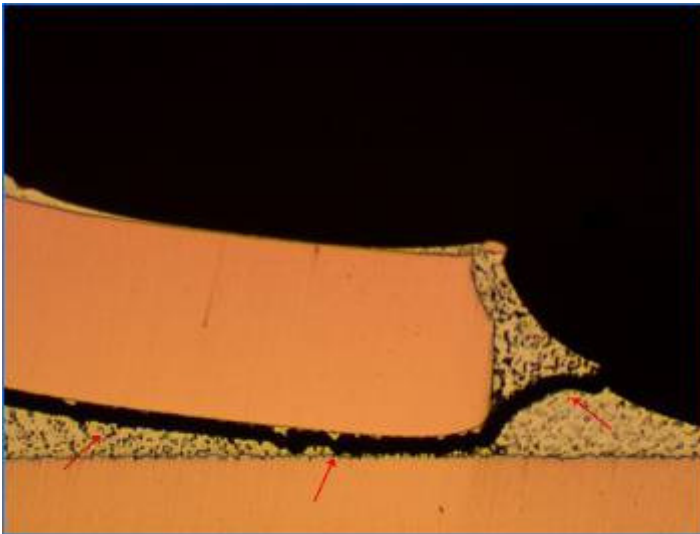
cross section, SN67, U31, right lead solder crack, 200xb
